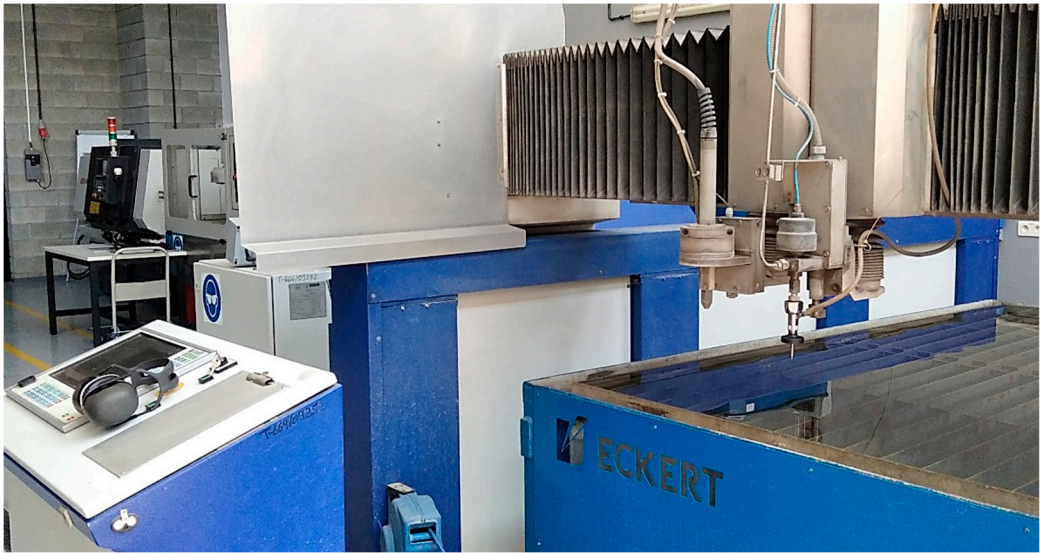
Eckert WaterJet COMBO portal cutting machine.
